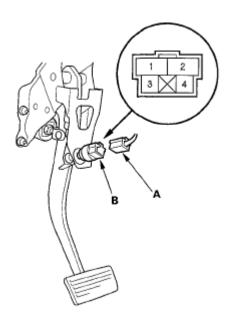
Identifying 4P Connector Of Brake Pedal Position Switch Courtesy of AMERICAN HONDA MOTOR CO., INC.
